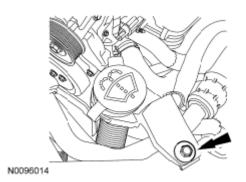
Locating A/C Tube/Windshield Washer Reservoir Bracket Bolt Courtesy of FORD MOTOR CO.
